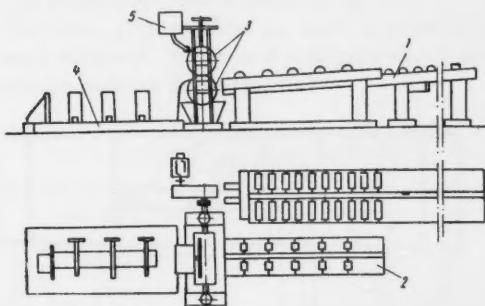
Diagram of the old oiling machine: 1) gravity roller tables with metal rollers; 2) gravity roller tables with felt rollers; 3) rollers; 4) frame; 5) oil tank.
